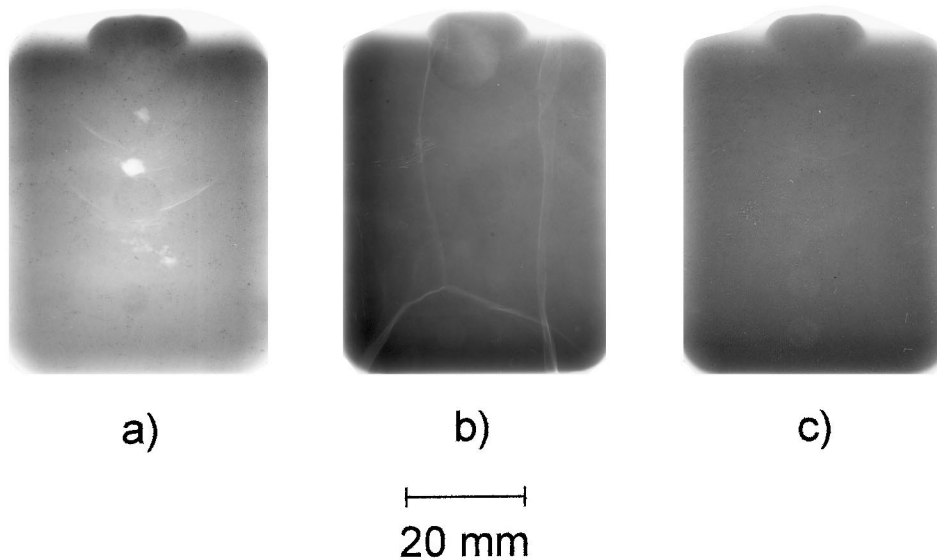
X-ray radiographs of 25 mm thick mouldings: (a) conventional moulding as moulded, (b) insulated sprue moulding after binder removal, and (c) low pressure insulated sprue moulding after binder removal.
